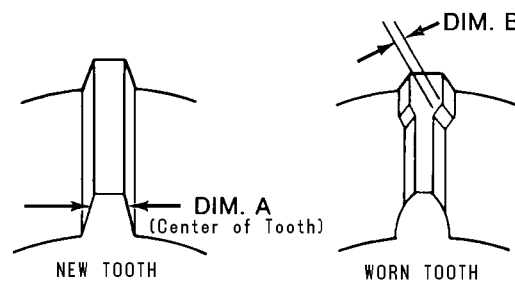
GEAR TOOTH WEAR LIMITS
